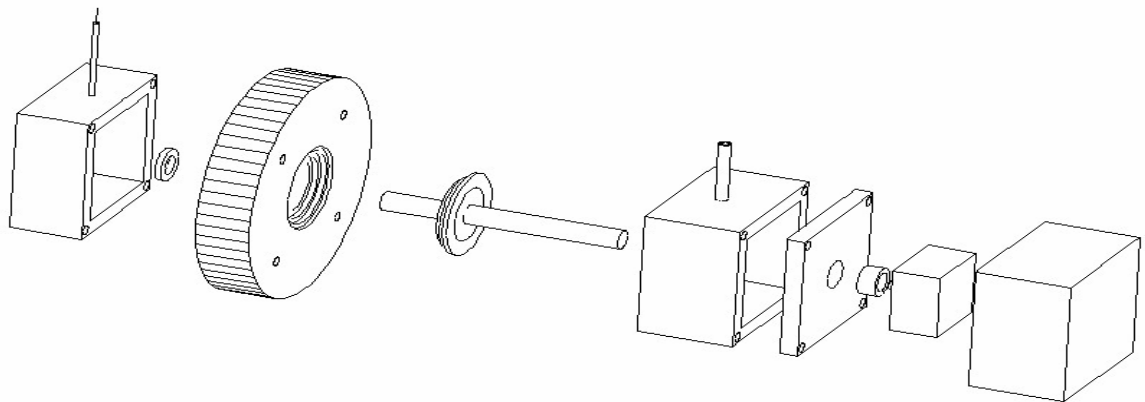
Exploded View of Enclosed Seal Assembly Drawing
